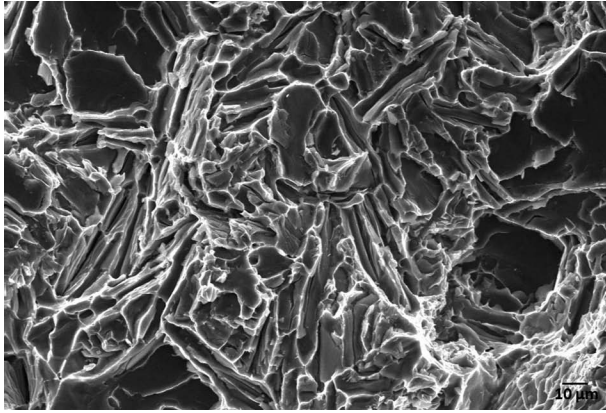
Another view of the fracture surface of the specimen shown in Fig. 247
